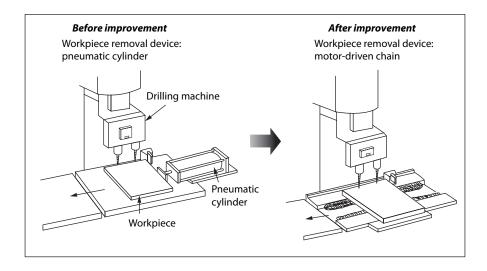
Use of Motor-Driven Chain as Automatic Workpiece Removal Device.
